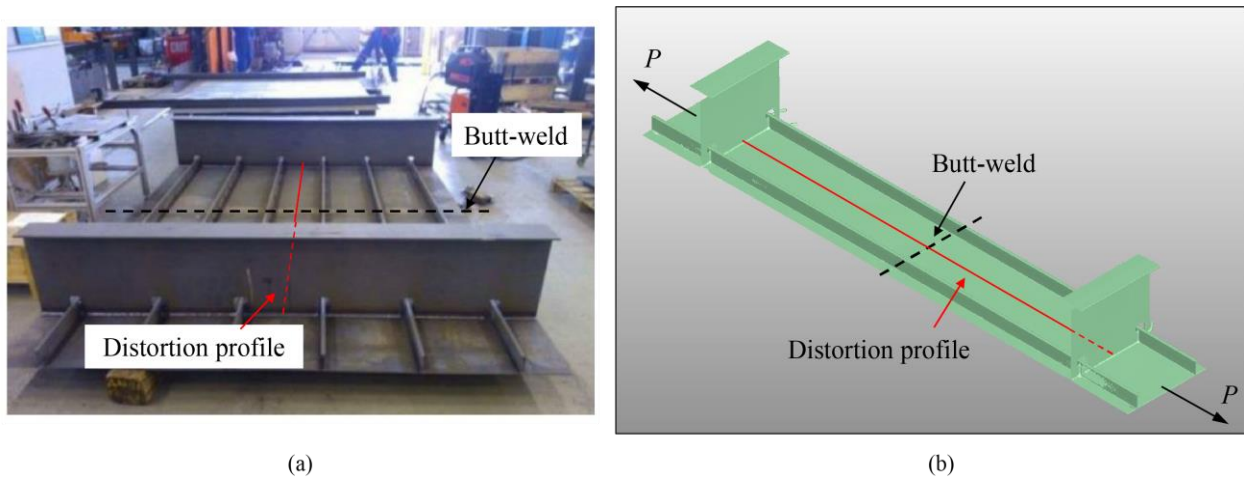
Full-scale stiffened panel (4-mm thick base plate) and full-scale fatigue test specimen containing a hybrid laser butt-weld [41]: (a) Full scale stiffened panel; (b) Illustration of full-scale fatigue test specimen extracted from (a) for distortion measurements and fatigue testing.
